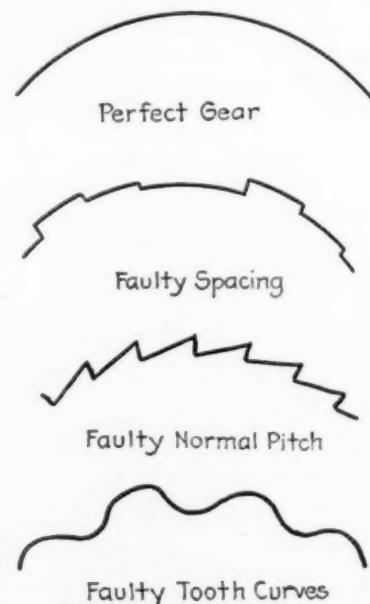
TYPES OF CHARTS PRODUCED ON SAURER MACHINE BY DIFFERENT GEAR INACCURACIES
